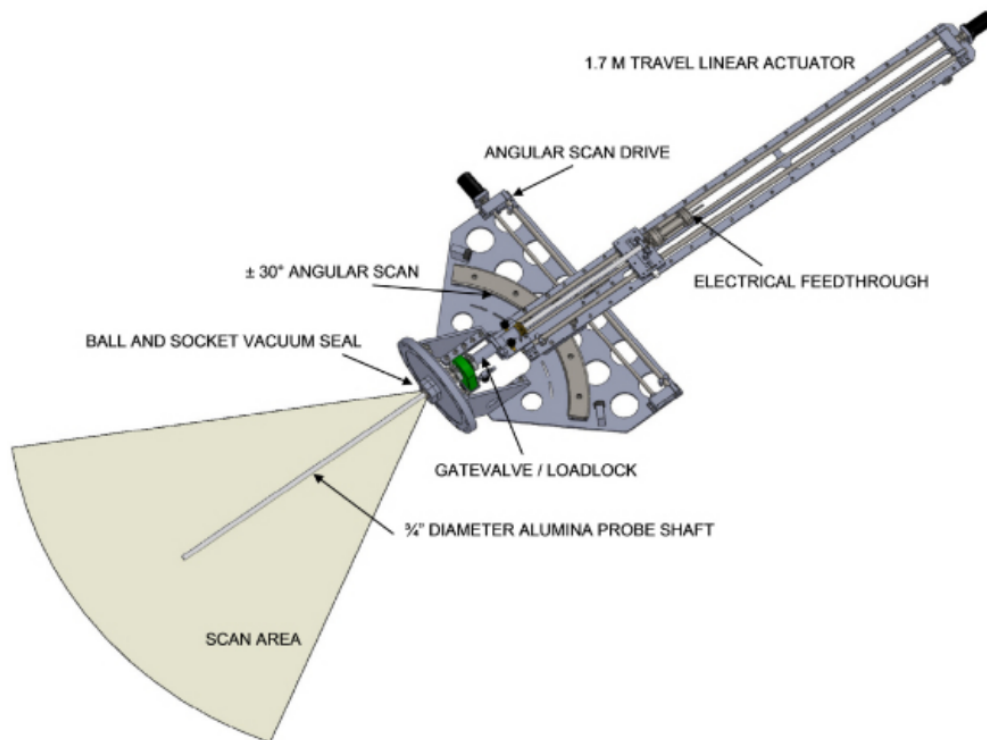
A CAD schematic of the sweep stage assembly. Rotation around the ball joint allows for coverage on a 2-dimensional plane inside the vessel. Figure taken from Ref. [55].
